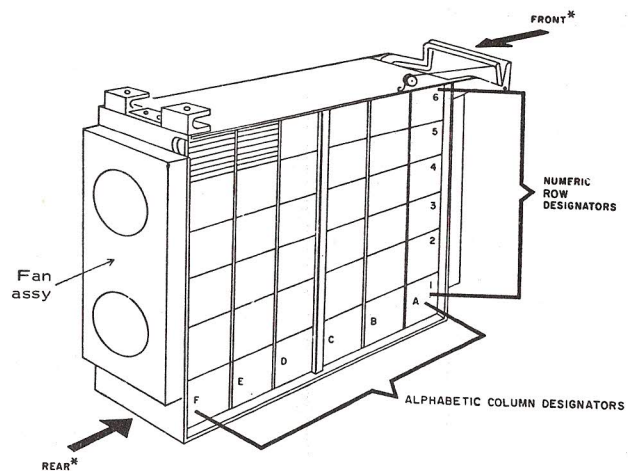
Central Processor Unit Tilt-Out Drawer Assembly (Pac Side)
